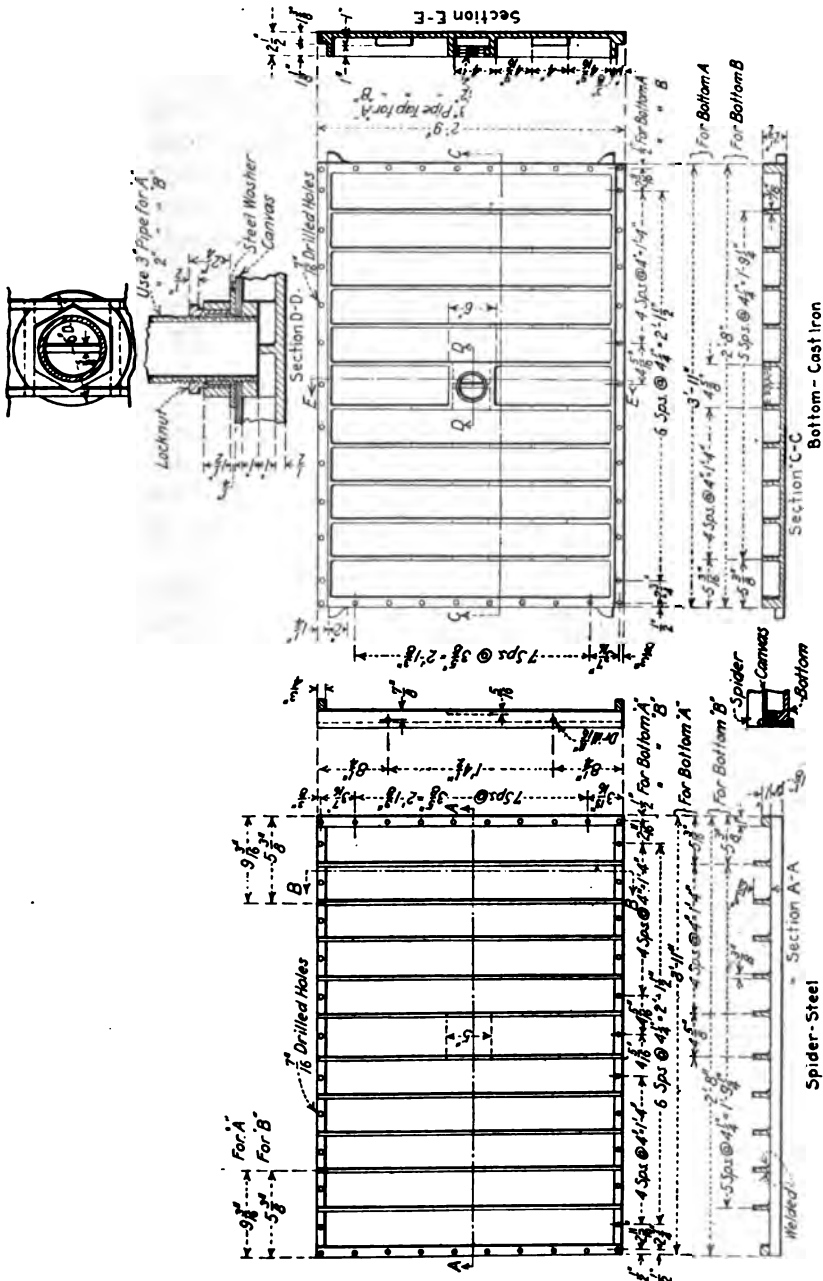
INSPIRATION FLOTATION MACHINE BOTTOMS.
